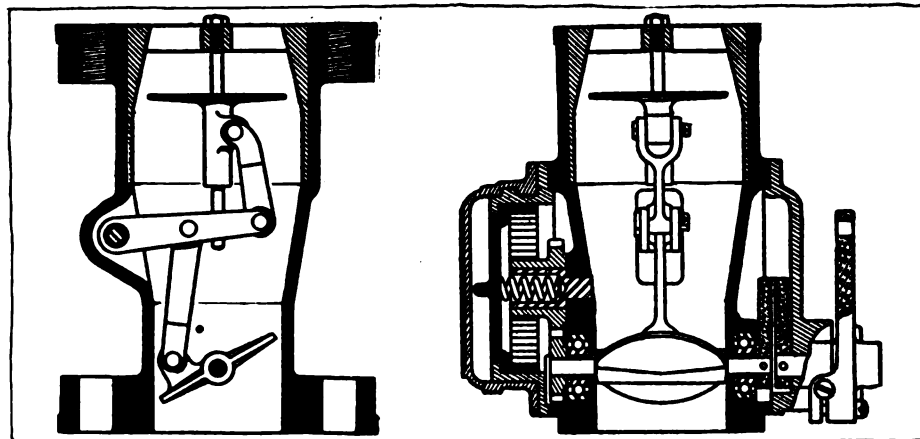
Sections through Kramer engine governor showing operating disk which is raised or lowered according to the speed of the incoming gases, thus opening or closing the butterfly valve below
